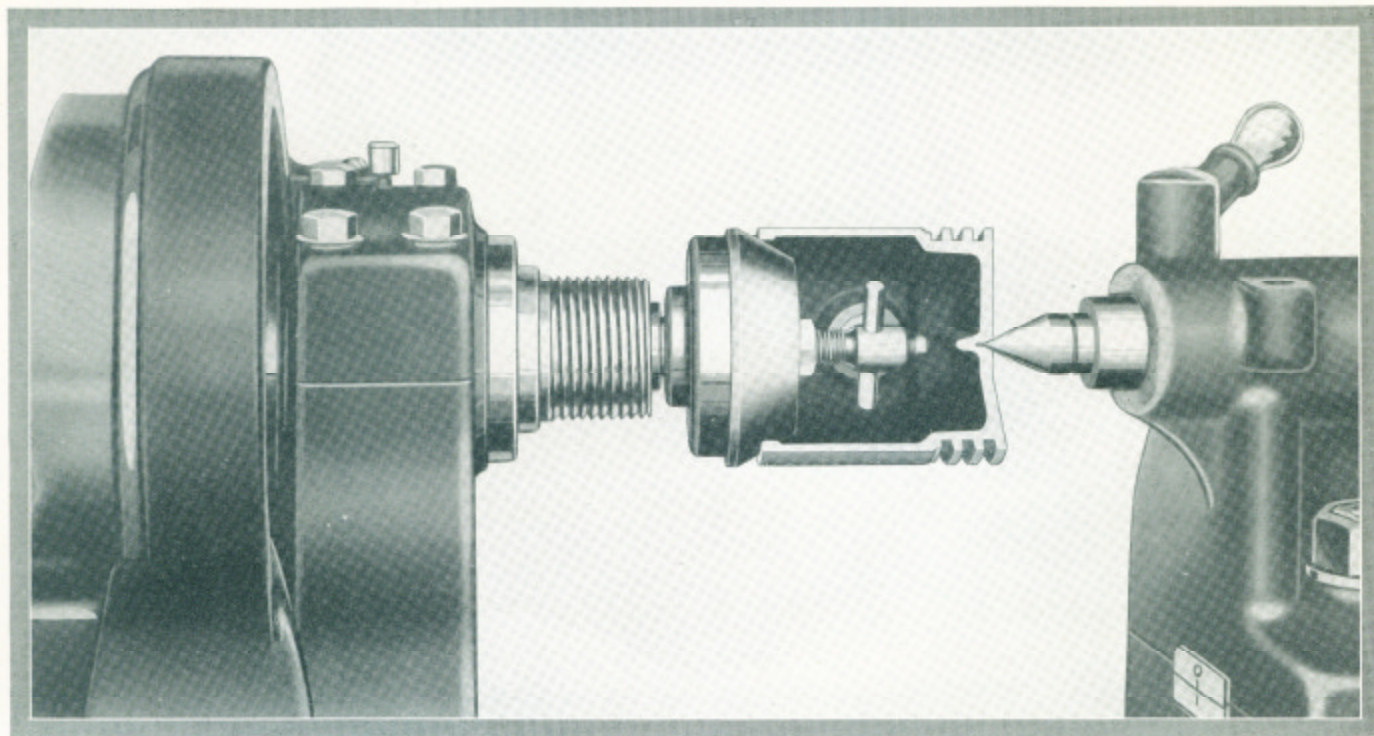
P. A Piston Mounted on the No. 44 South Bend Cone Ring Adapter
